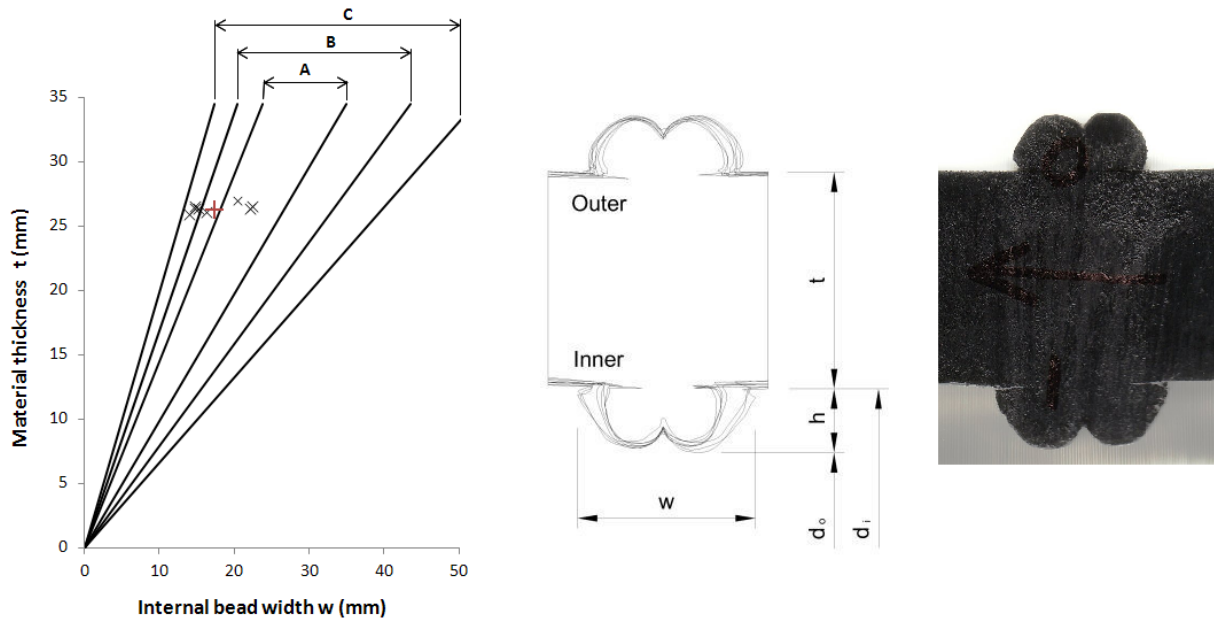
a) Internal bead dimension in comparison with DVS prescription b) Cross sections of internal bead around circumference c) Cross section of butt welded joint of polyethylene pipeline dimension  $d280 \times 25.4$  SDR11 PE100
